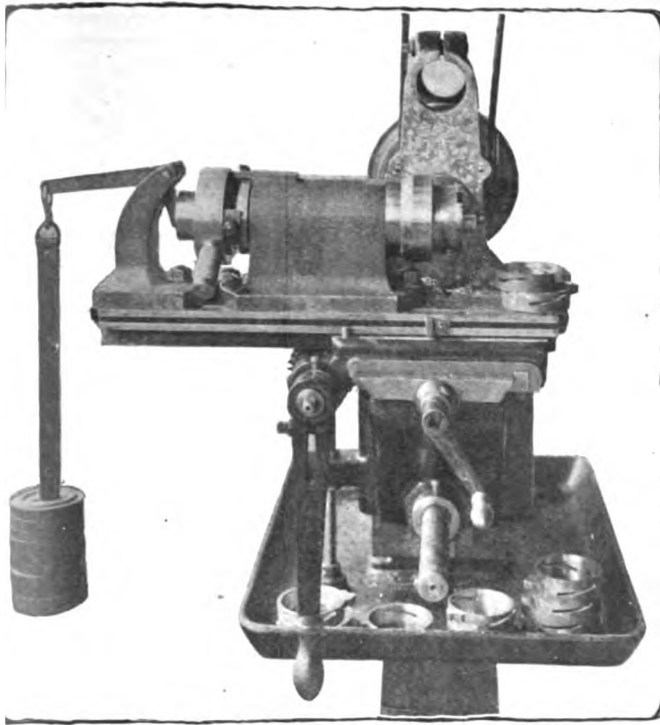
Rear view of tool used in slotting cams for the New-Miller carbureter
